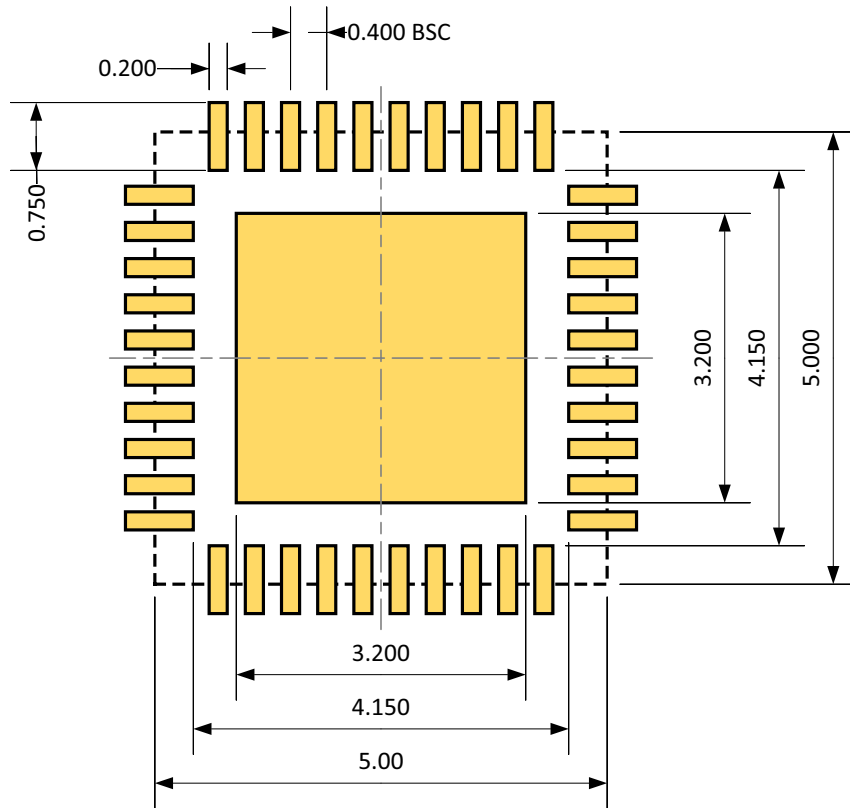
Recommended Board Layout for QFN40 package (All Dimensions in mm)
